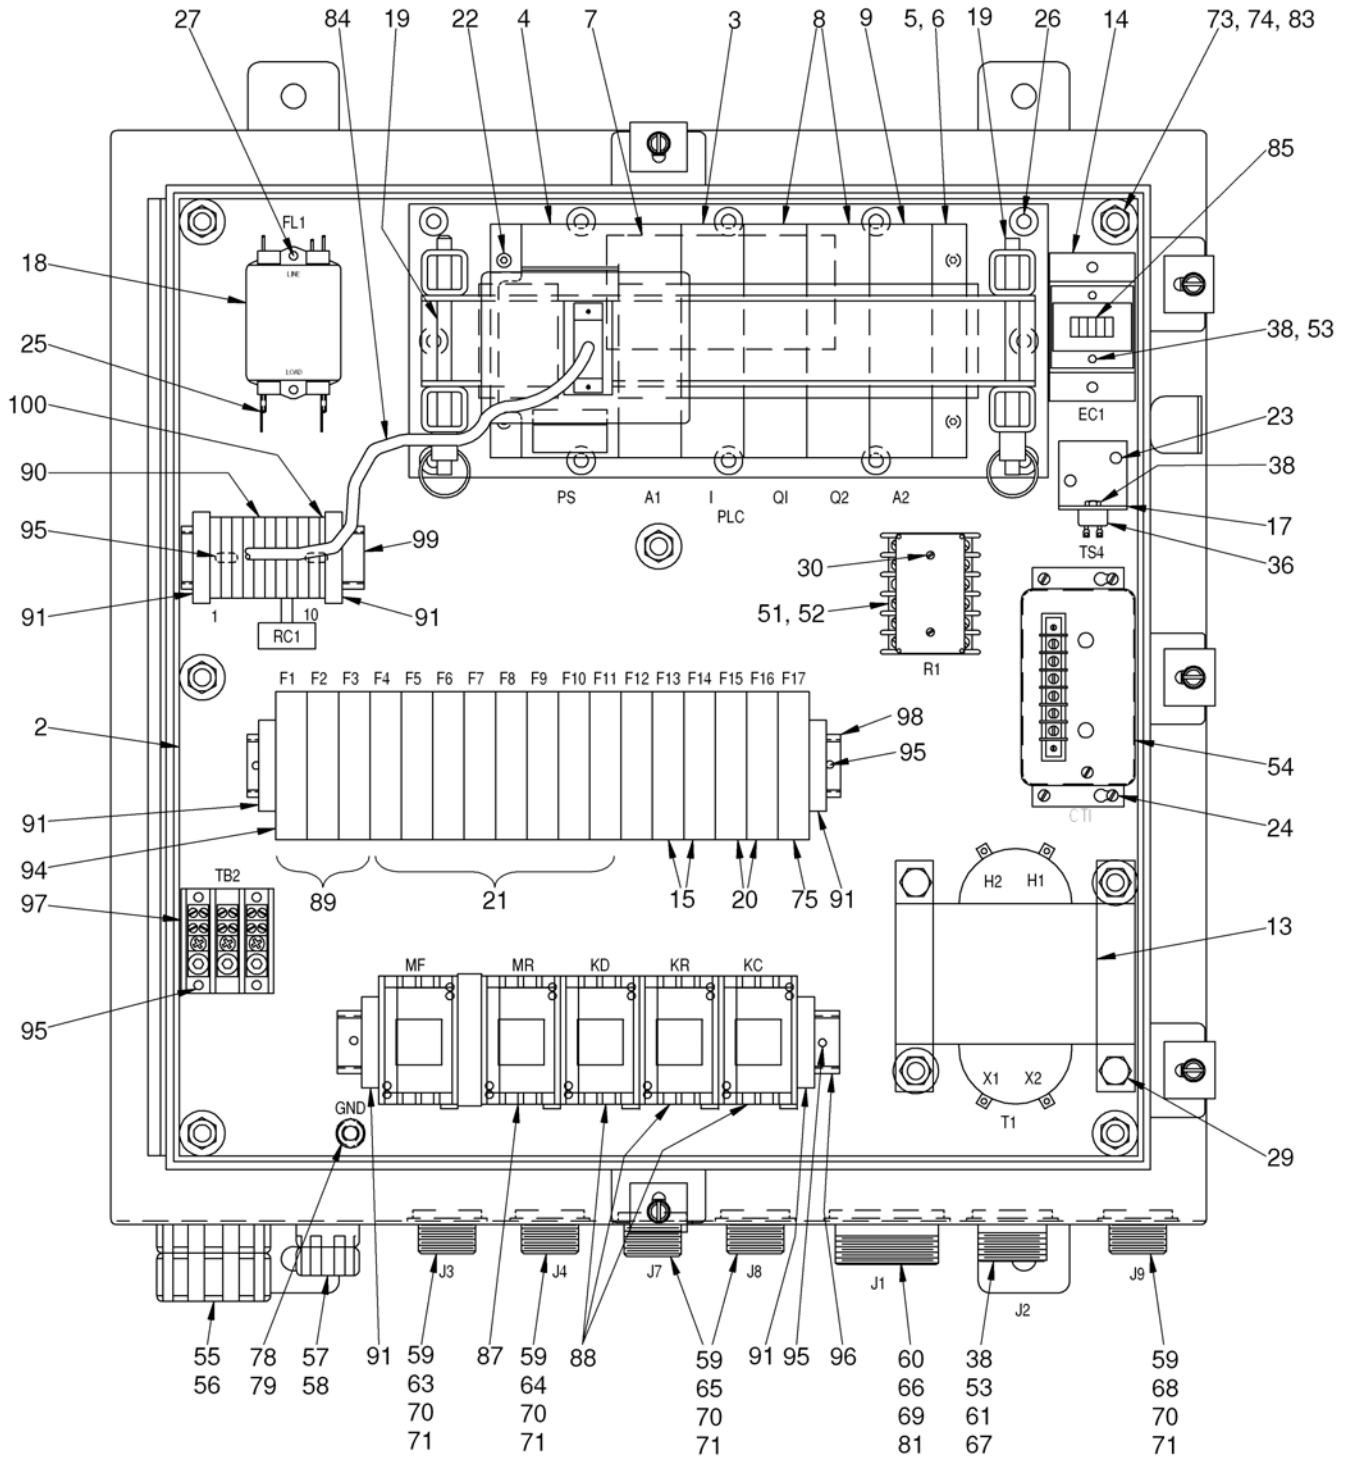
CMU Rear Electrical Enclosure Assembly (Sheet 2 of 3)
